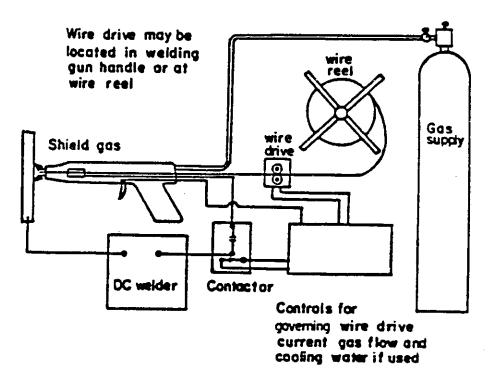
SCHEMATIC DIAGRAM OF GAS METAL ARC WELDING PROCESS
